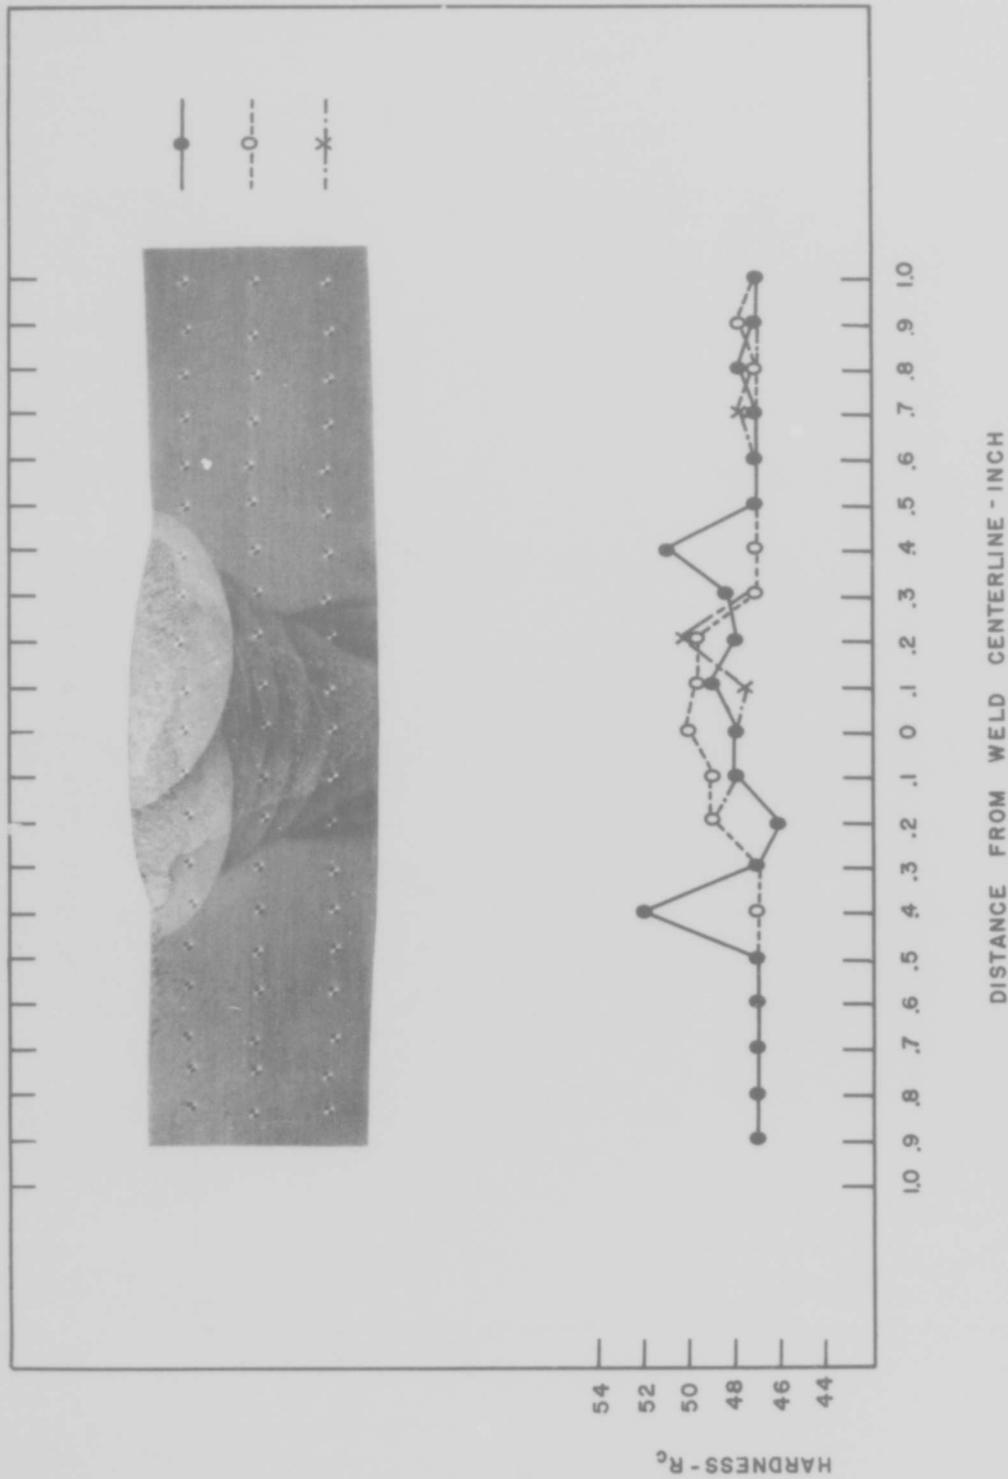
Hardness Survey of TIG Weld No. H251 Made in HP 9-4-20 Plate Using Filler Wire No. 15 (HP 9-4-20 Modified with 0.12%Al).
